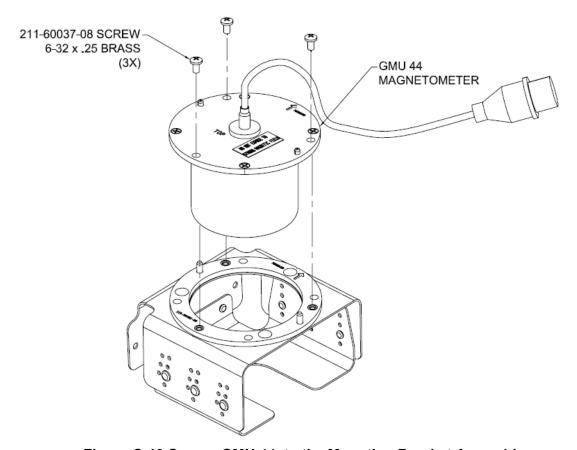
Secure GMU 44 to the Mounting Bracket Assembly
